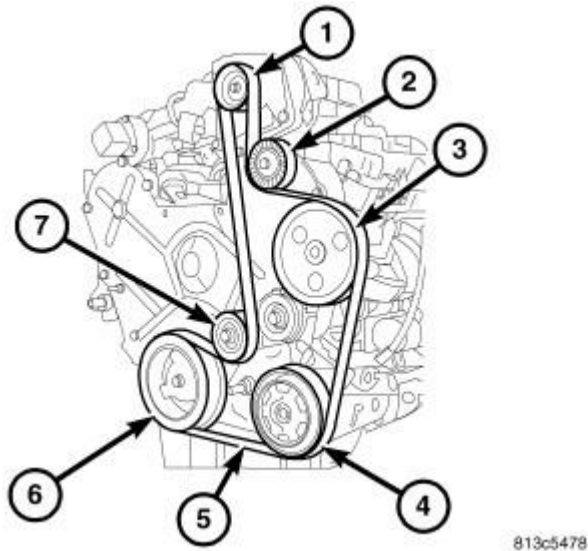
3.5L ENGINE ACCESSORY DRIVE BELT INSTALLATION
